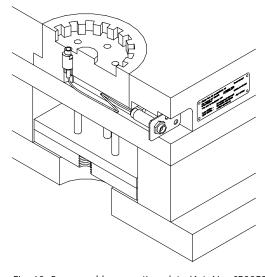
Sensor, cable, mounting plate (Art. No. 65005208) and identification label
